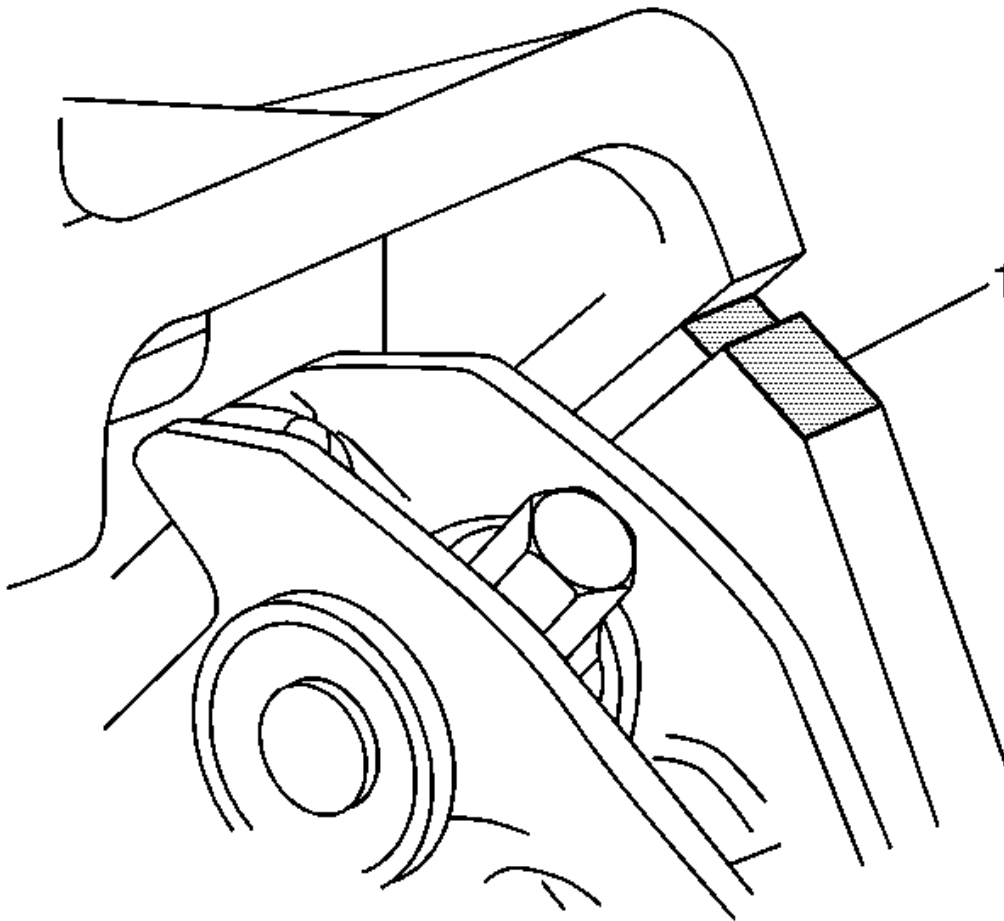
Identifying Cylinder Head To Lower Intake Manifold Joint
